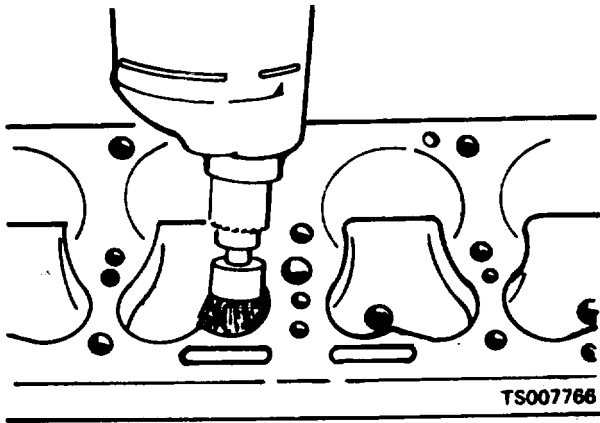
Cleaning Carbon From Combustion Chamber.
